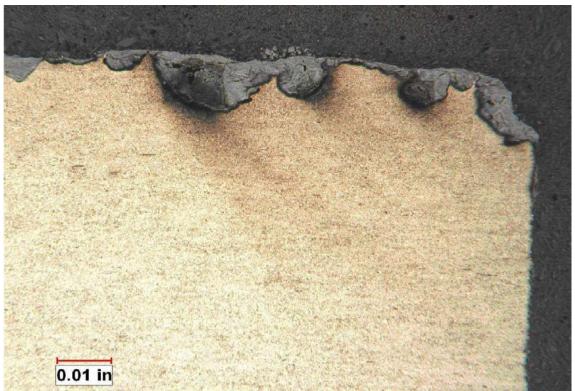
Photo 4. The view depicts a longitudinal metallographic cross-section through the origin of the fracture showing the depth of the corrosion pitting
